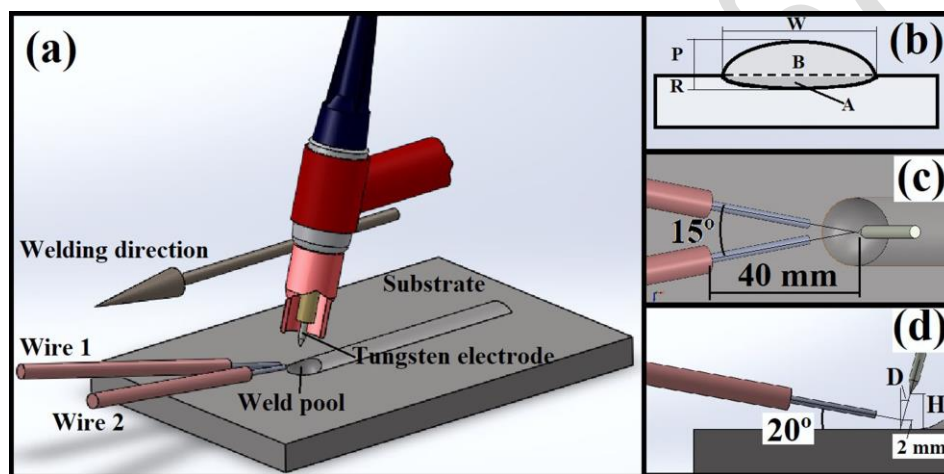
Welding scheme (a), (c), (d), and bead geometry and dilution parameters (b).
